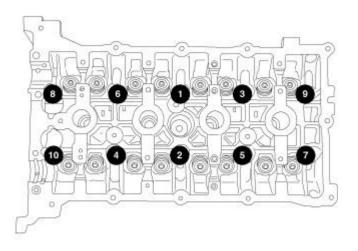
Cylinder Head Bolt Tightening Sequence Courtesy of CHRYSLER GROUP, LLC
